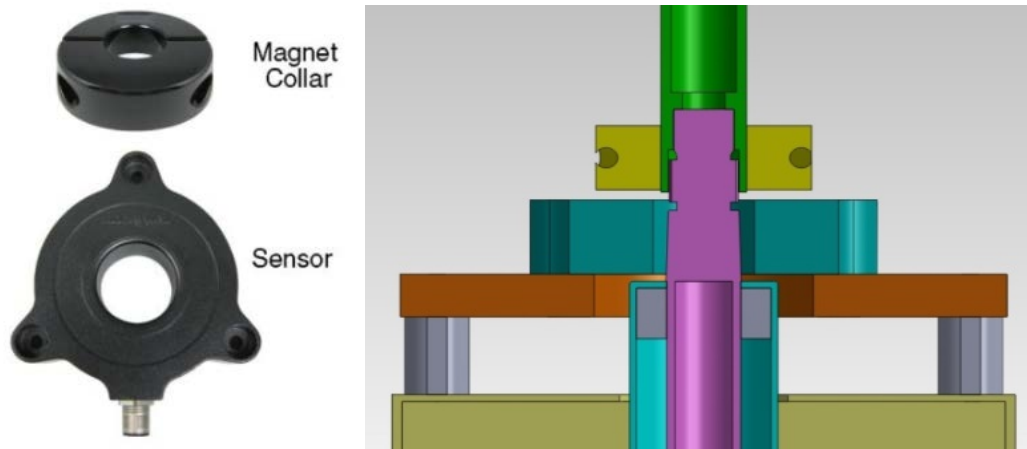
Steering Wheel Angle Sensor Illustration (Courtesy: Honeywell).
